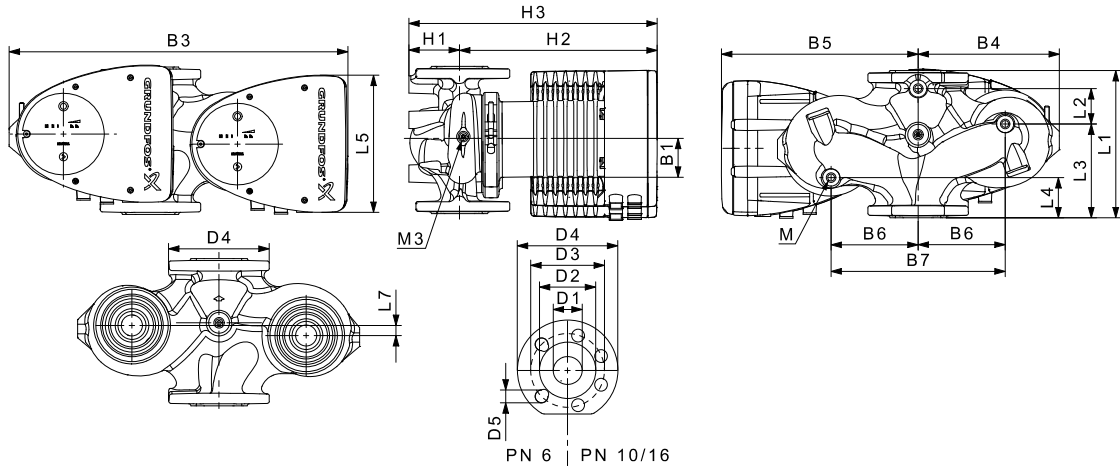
Twin-head pump dimensions, terminal-connected versions, flanged version
